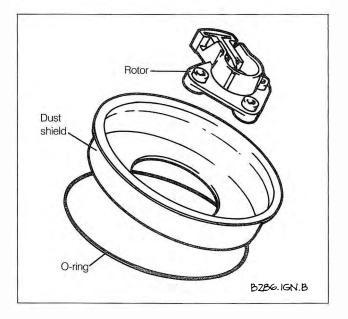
Ignition rotor, distributor cap dust shield and O-ring.
